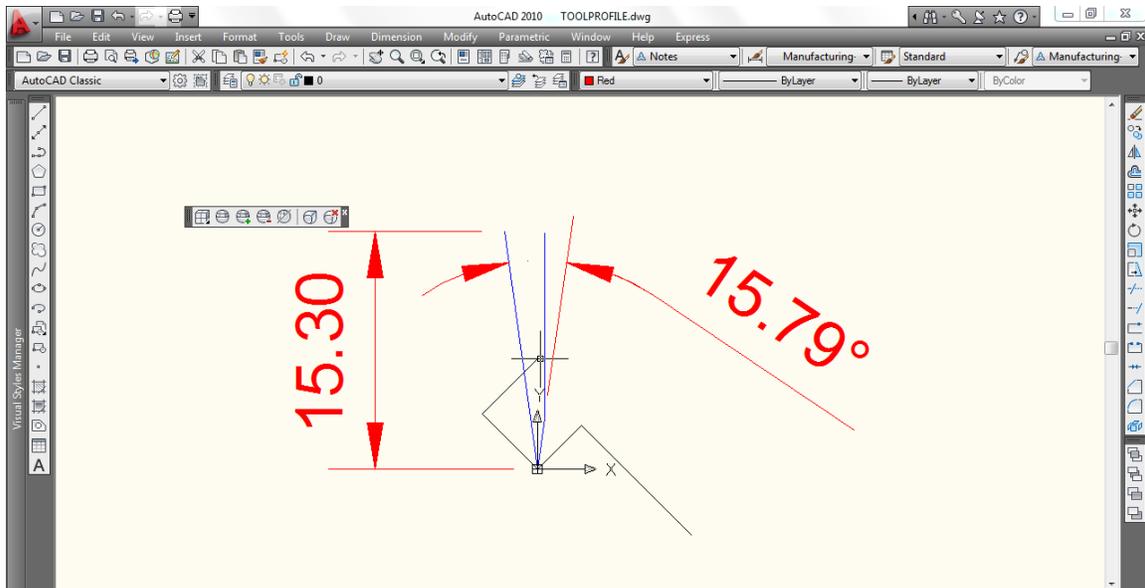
Tool and part coordinates dimensions for collision detection test in the AutoCAD window.
